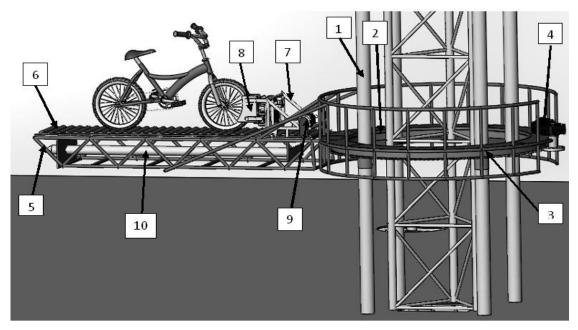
Auto-operator general layout: 1 - power frame with guides; 2 - upper platform; 3 - lower platform; 4 - rotary mechanism; 5 - arrow; 6 - rollers; 7 - carriage; 8 - delight; 9 - carriage engines; 10 - piston with a conical tip
